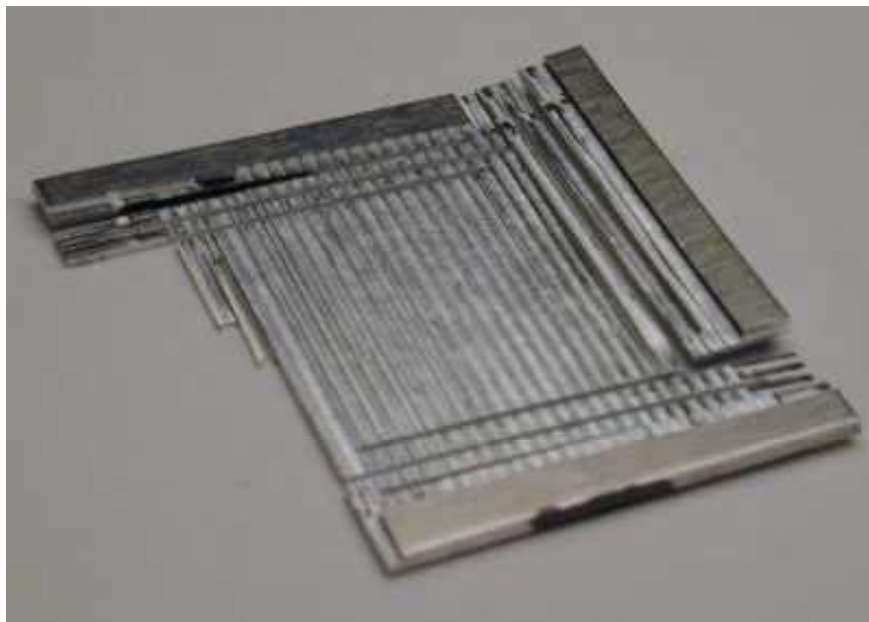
Photograph of the backside of the aluminum piece used in the macro-scale prototype.
